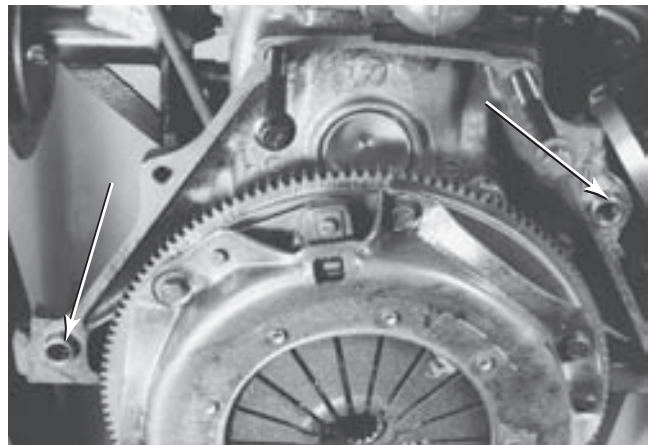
Bell housing alignment dowel pins are used to ensure proper alignment between the engine block and the transmission.
